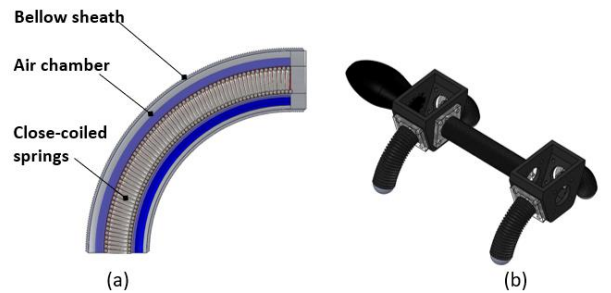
(a) Section view of reinforced actuator during bending. (b) CAD drawing of the quad-pedal
